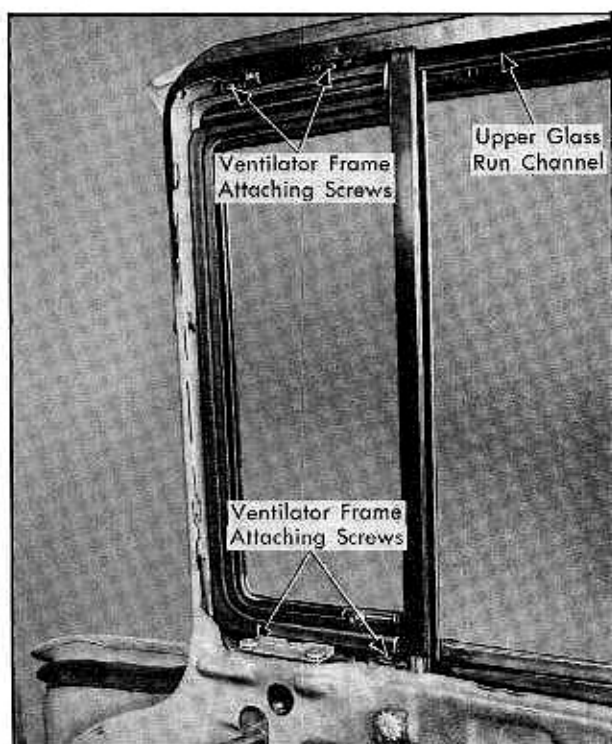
Ventilator Regulator Removal (6219, 605)
